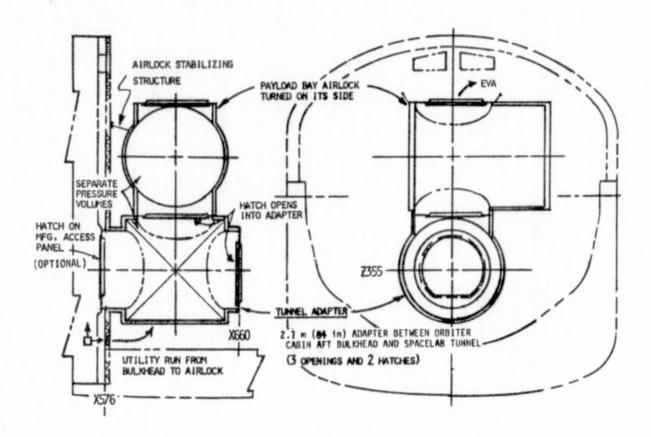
Tunnel Adapter/Airlock Installation
